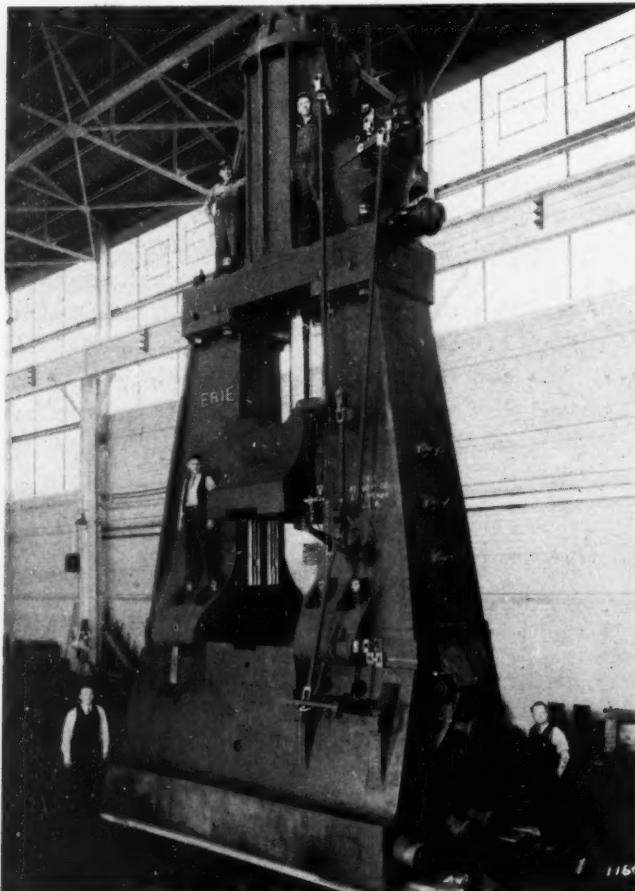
When installed, this huge forging hammer will extend 27 feet above floor and 12 feet below
